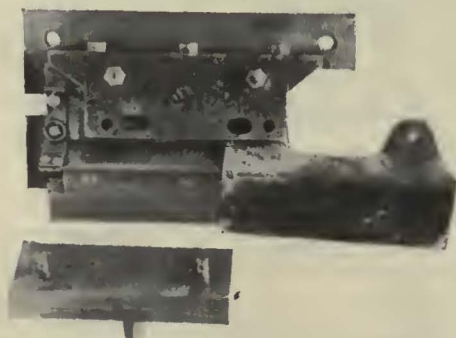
After Forming, the Wear Plates Shown in Fig. 6 Are Punched in This Jig
